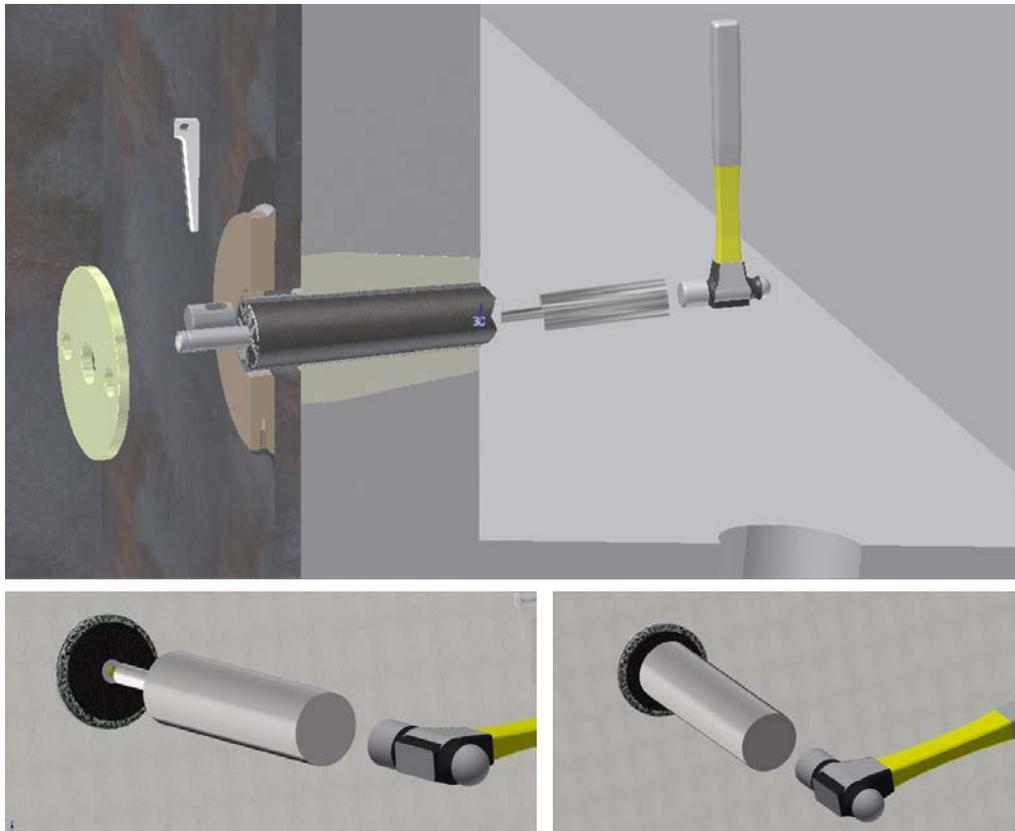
Removing the used sensor with the CasTemp [removal tool](#)
